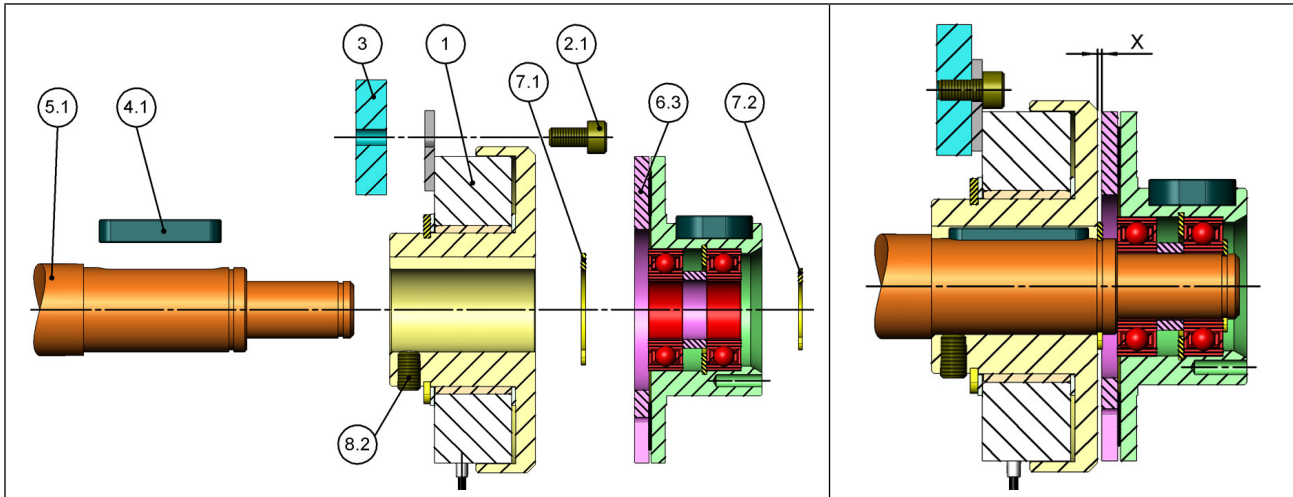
Shaft-mounted coupling with torque arm & armature element hub neck mounted outside (e.g. 01...07-03-640-xxxx)
